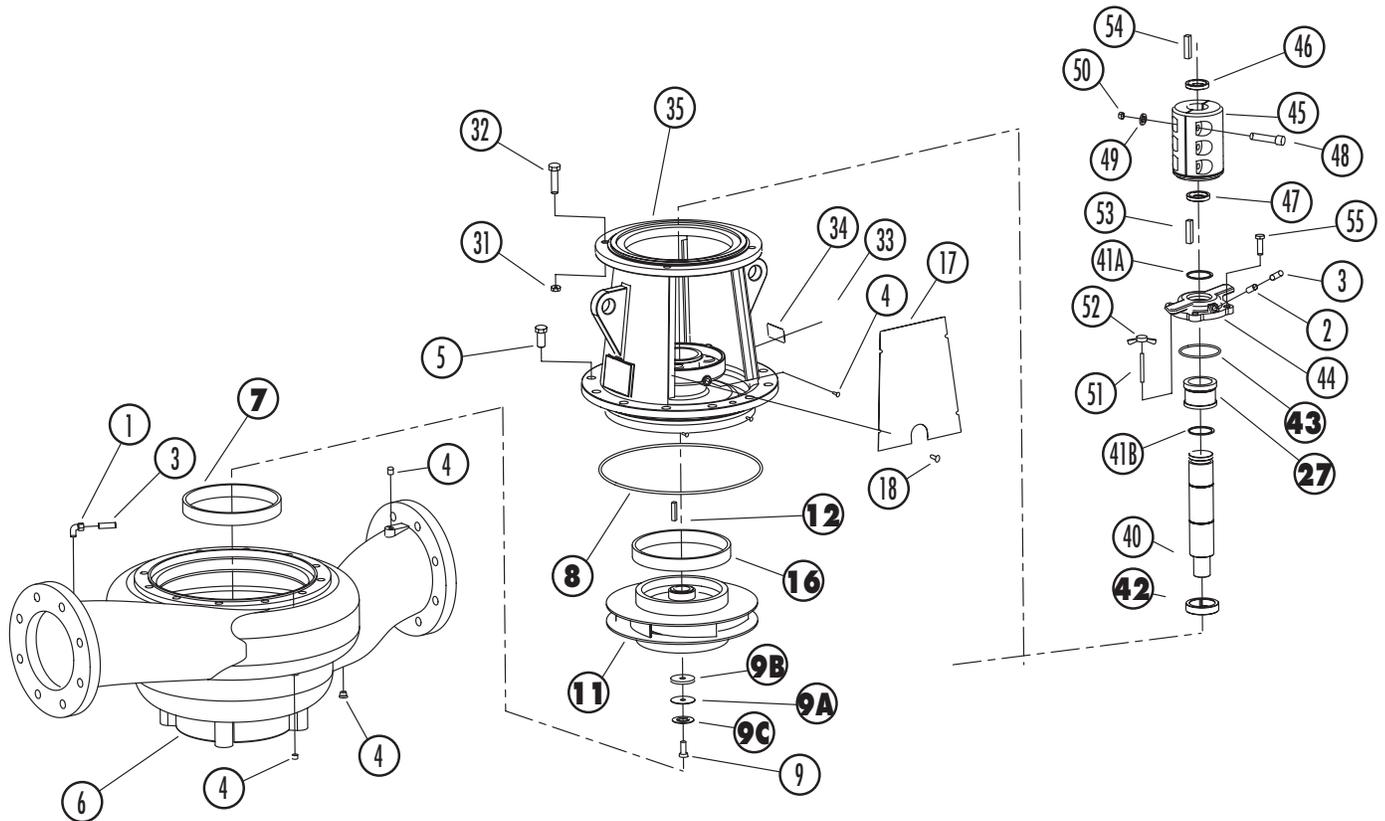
Model 1590SC Exploded View. Boldface numbers indicate recommended spare parts.
